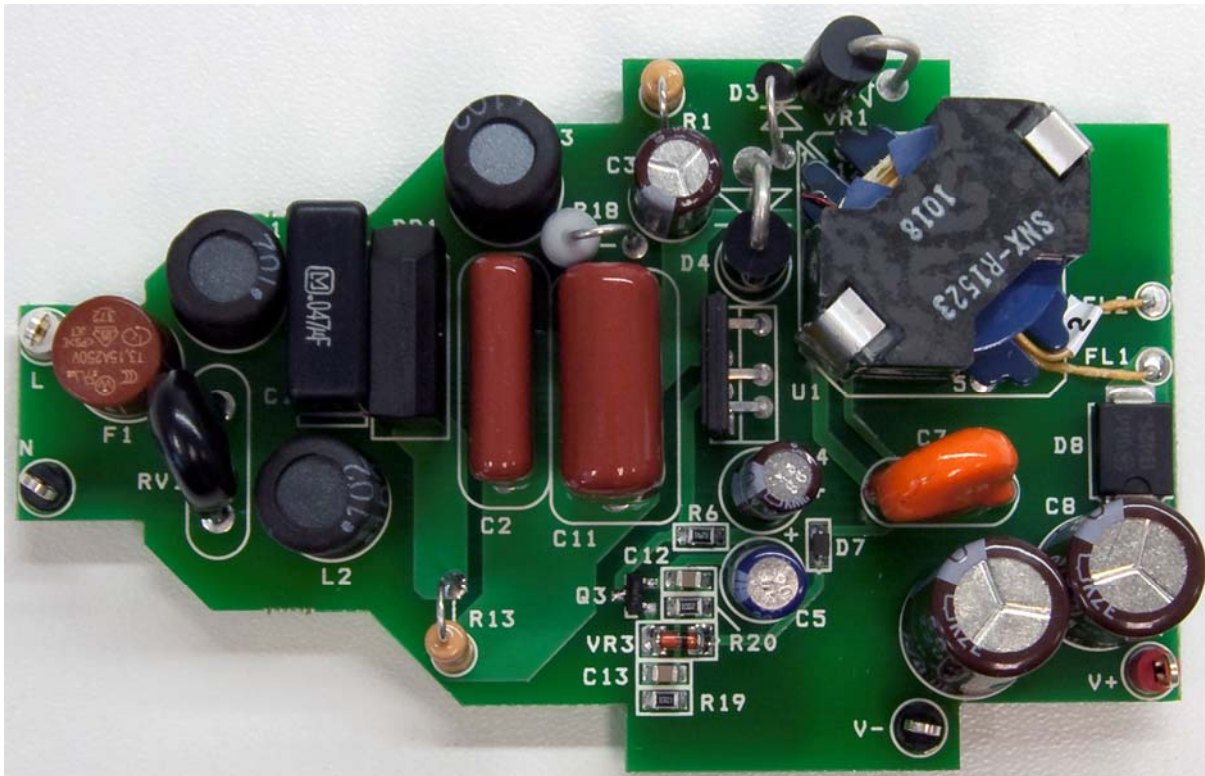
Populated Circuit Board Photograph (Top view). PCB Outline Designed to Fit Inside PAR38 Enclosure.
